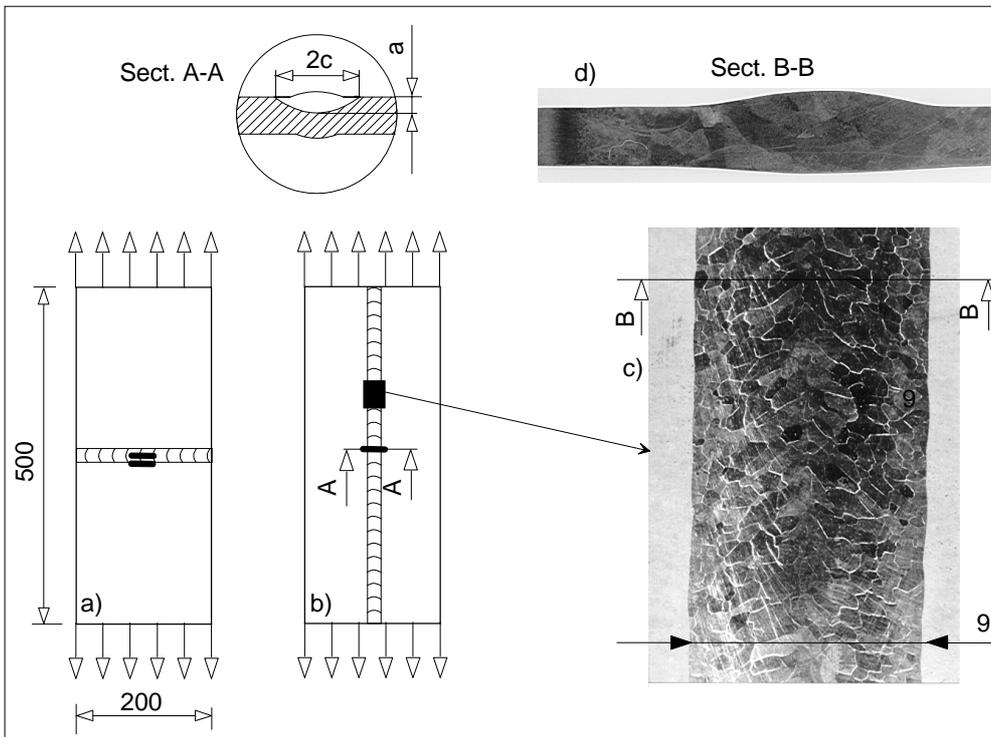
Specimen geometry and details of a weld bead.
